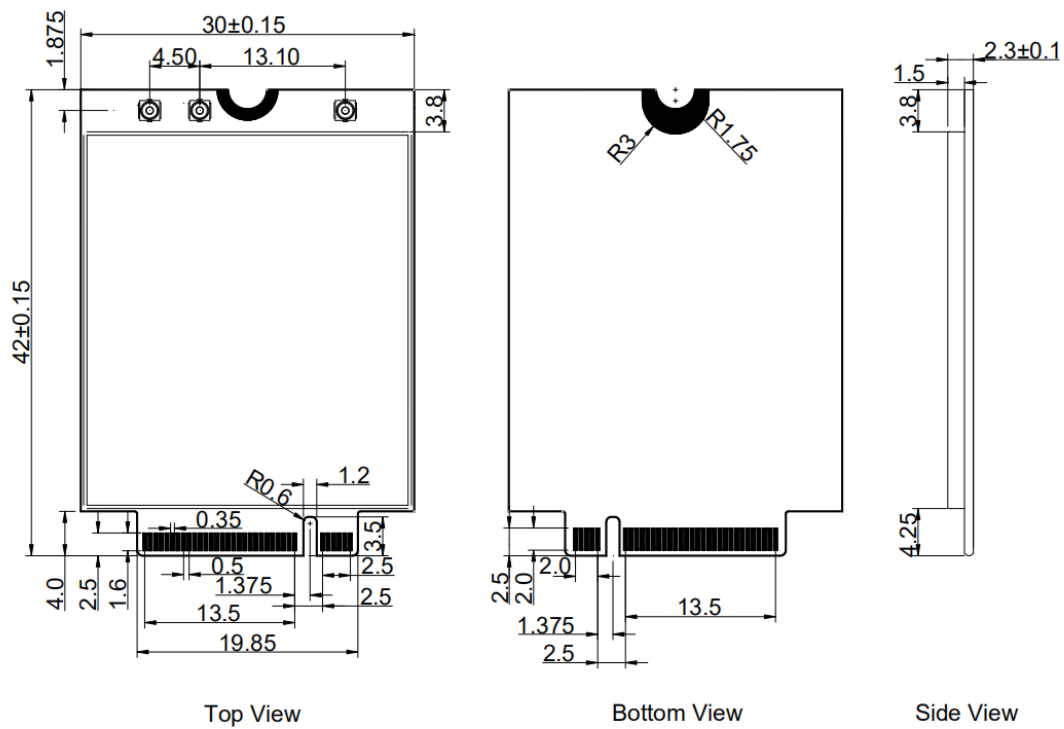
Mechanical Dimensions of EM12-G (Unit: mm)
